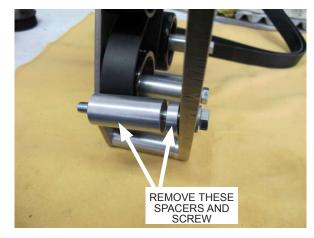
d: Temporarily remove these spacers, screw, and washer.
